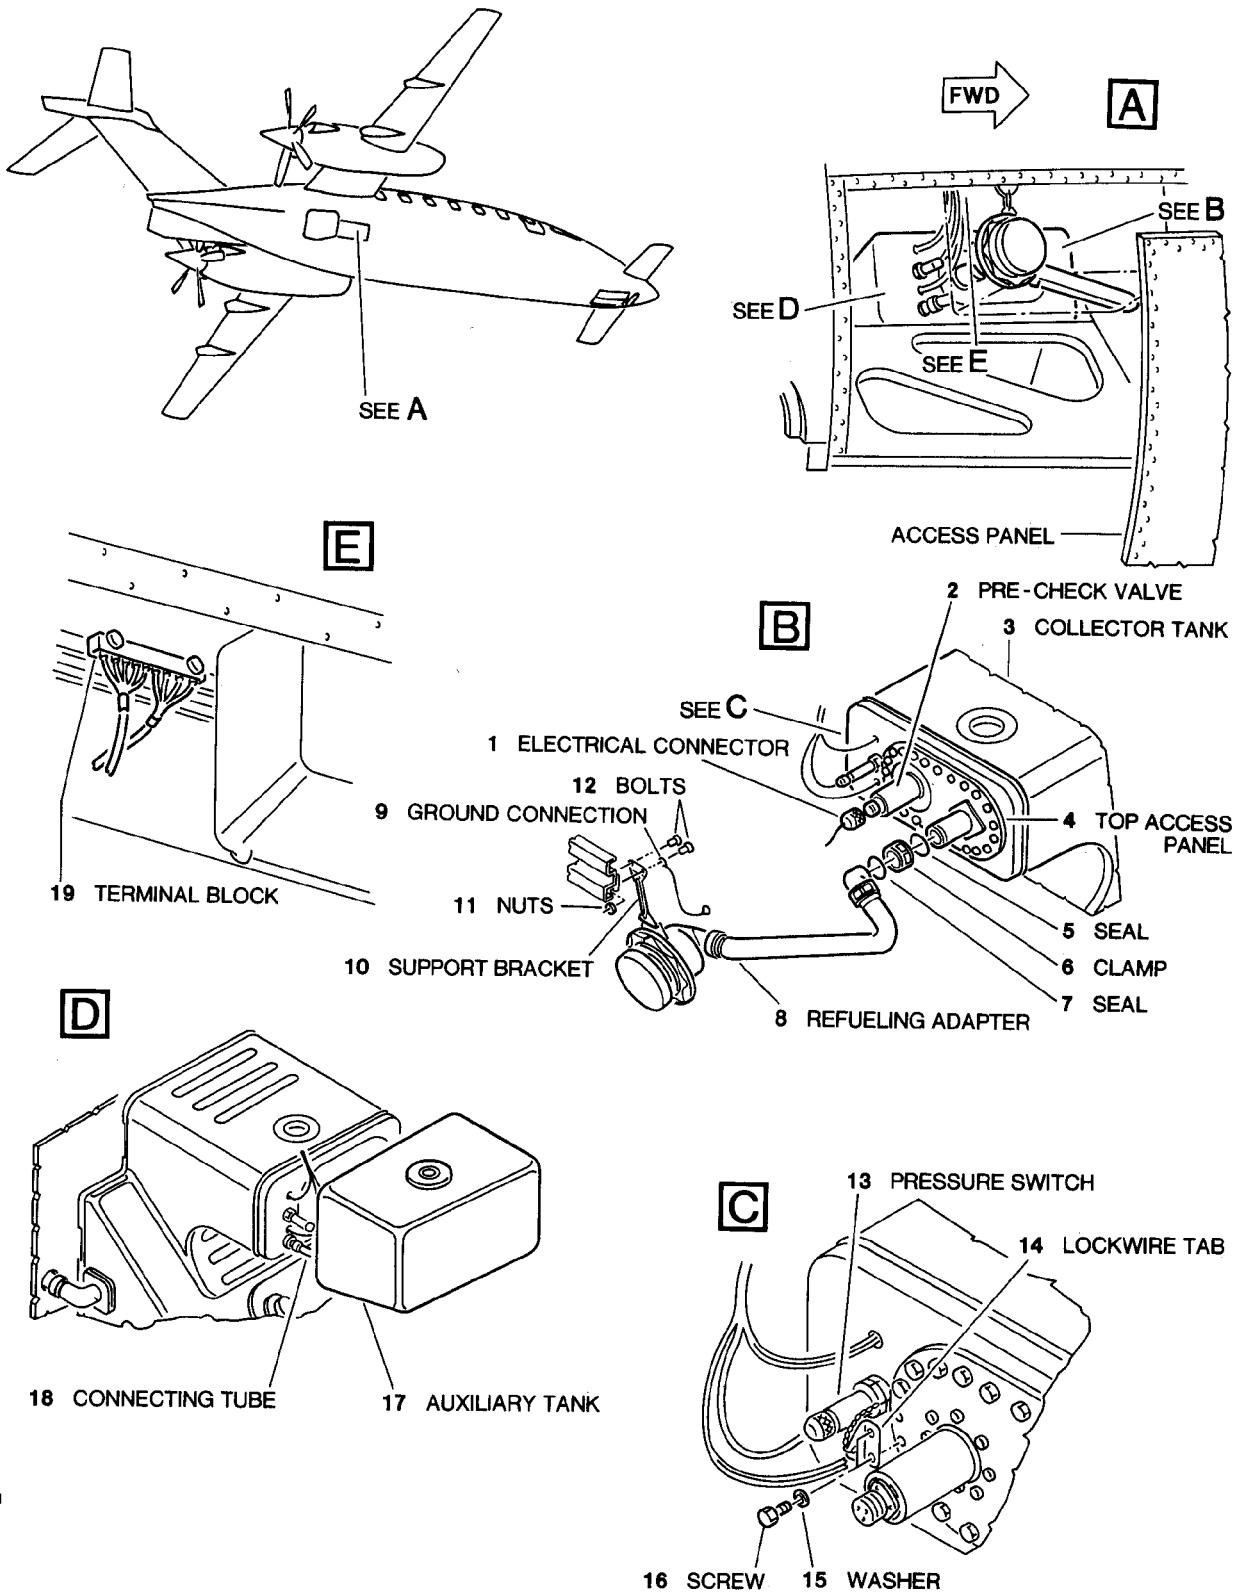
(Sheet 1) RH Fuel Collector Tank - Removal/Installation
